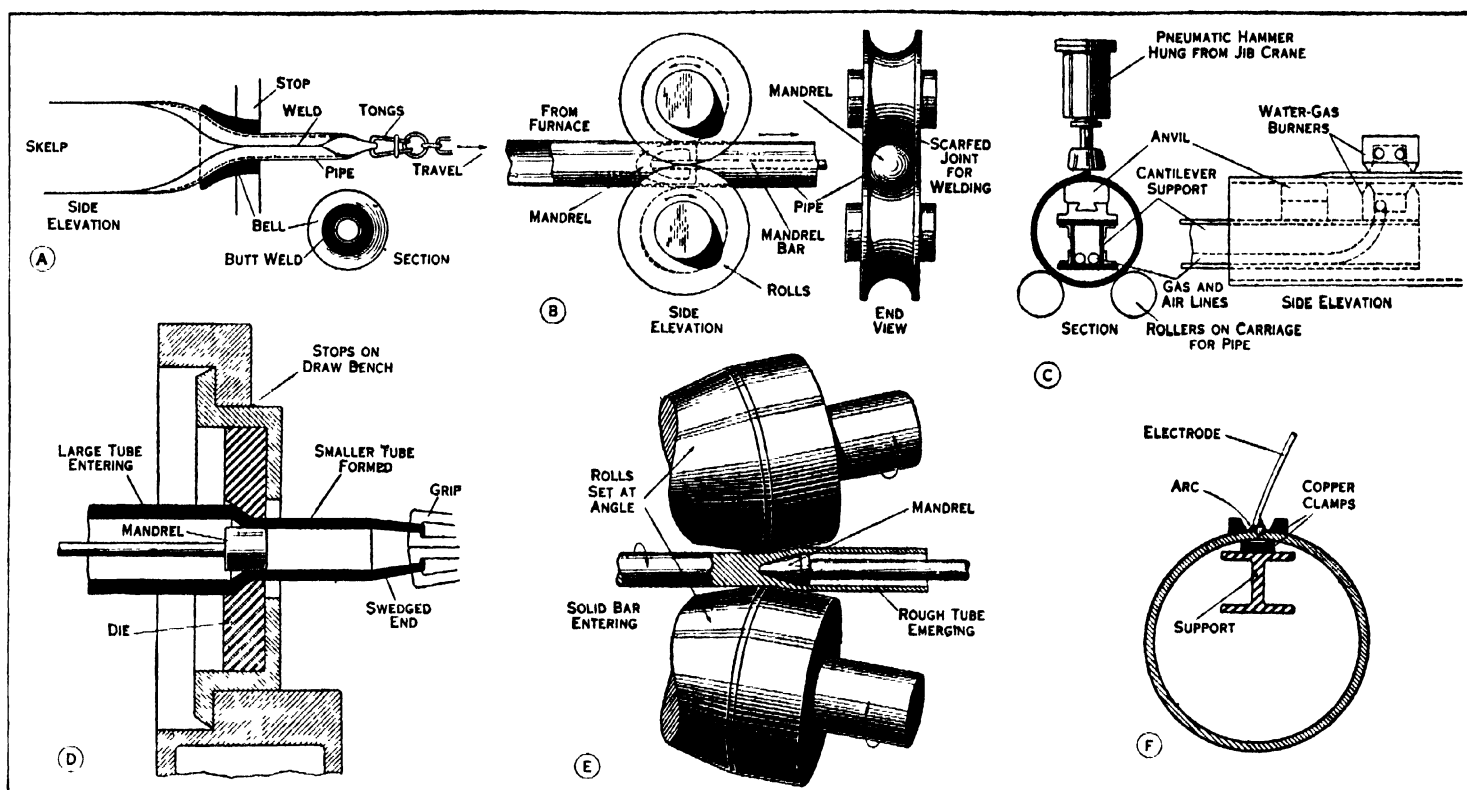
DIAGRAM ILLUSTRATING VARIOUS STEPS IN THE MANUFACTURE OF PIPE A. DRAWING OUT A 21 IN. PIPE; B. SIDE AND END VIEW OF LAP WELDING; C. HAMMER WELDING OF 30 IN. PIPE; D. DRAWING 6 IN. PIPE; E. DRAWING 21 IN. PIPE; F. ARC WELDING OF 30 IN. PIPE
